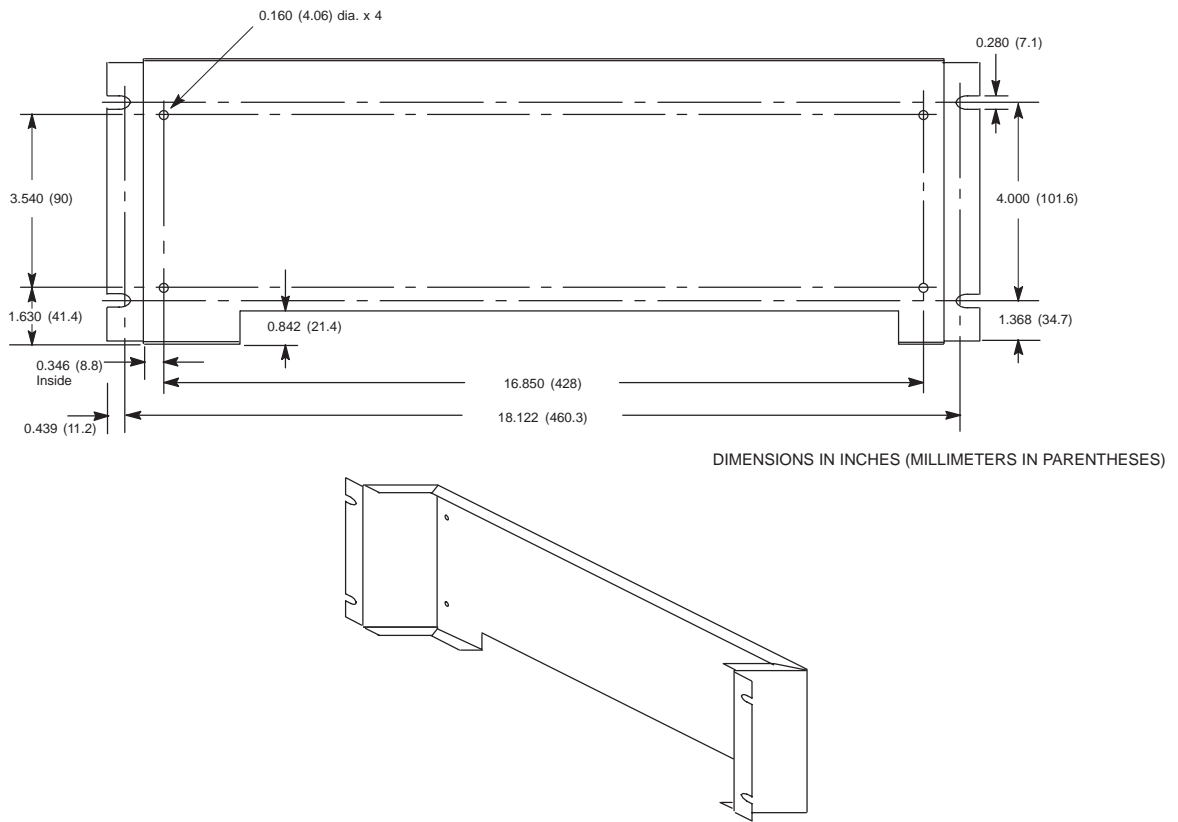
IC693ACC313 Recessed Adapter Bracket for 19" Rack Mounting
